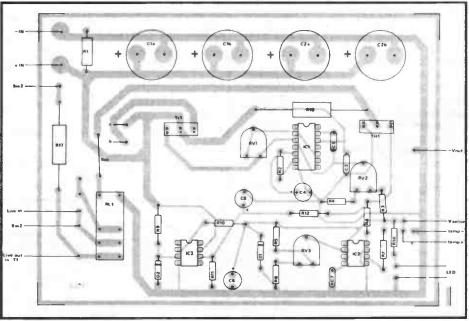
Component overlay of the main PCB. R13 and R17 are mounted off the board using 16swg tinned copper wire
